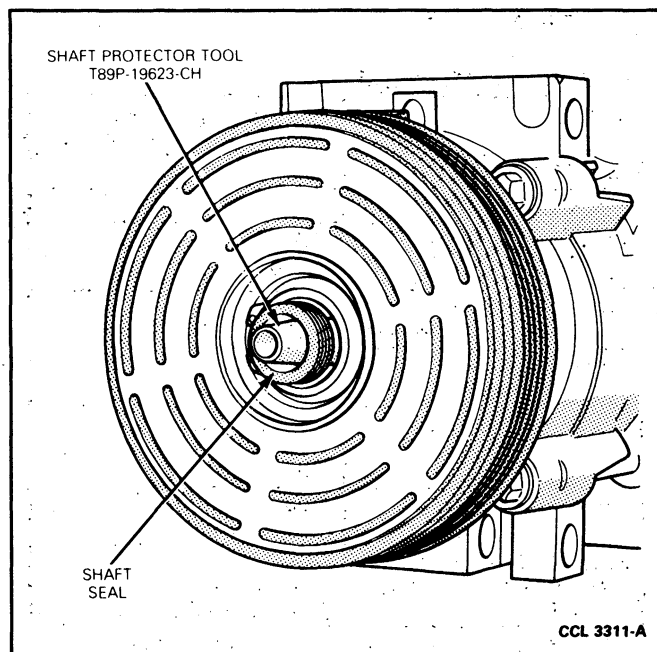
Shaft Seal Protector Tool on Compressor Shaft
